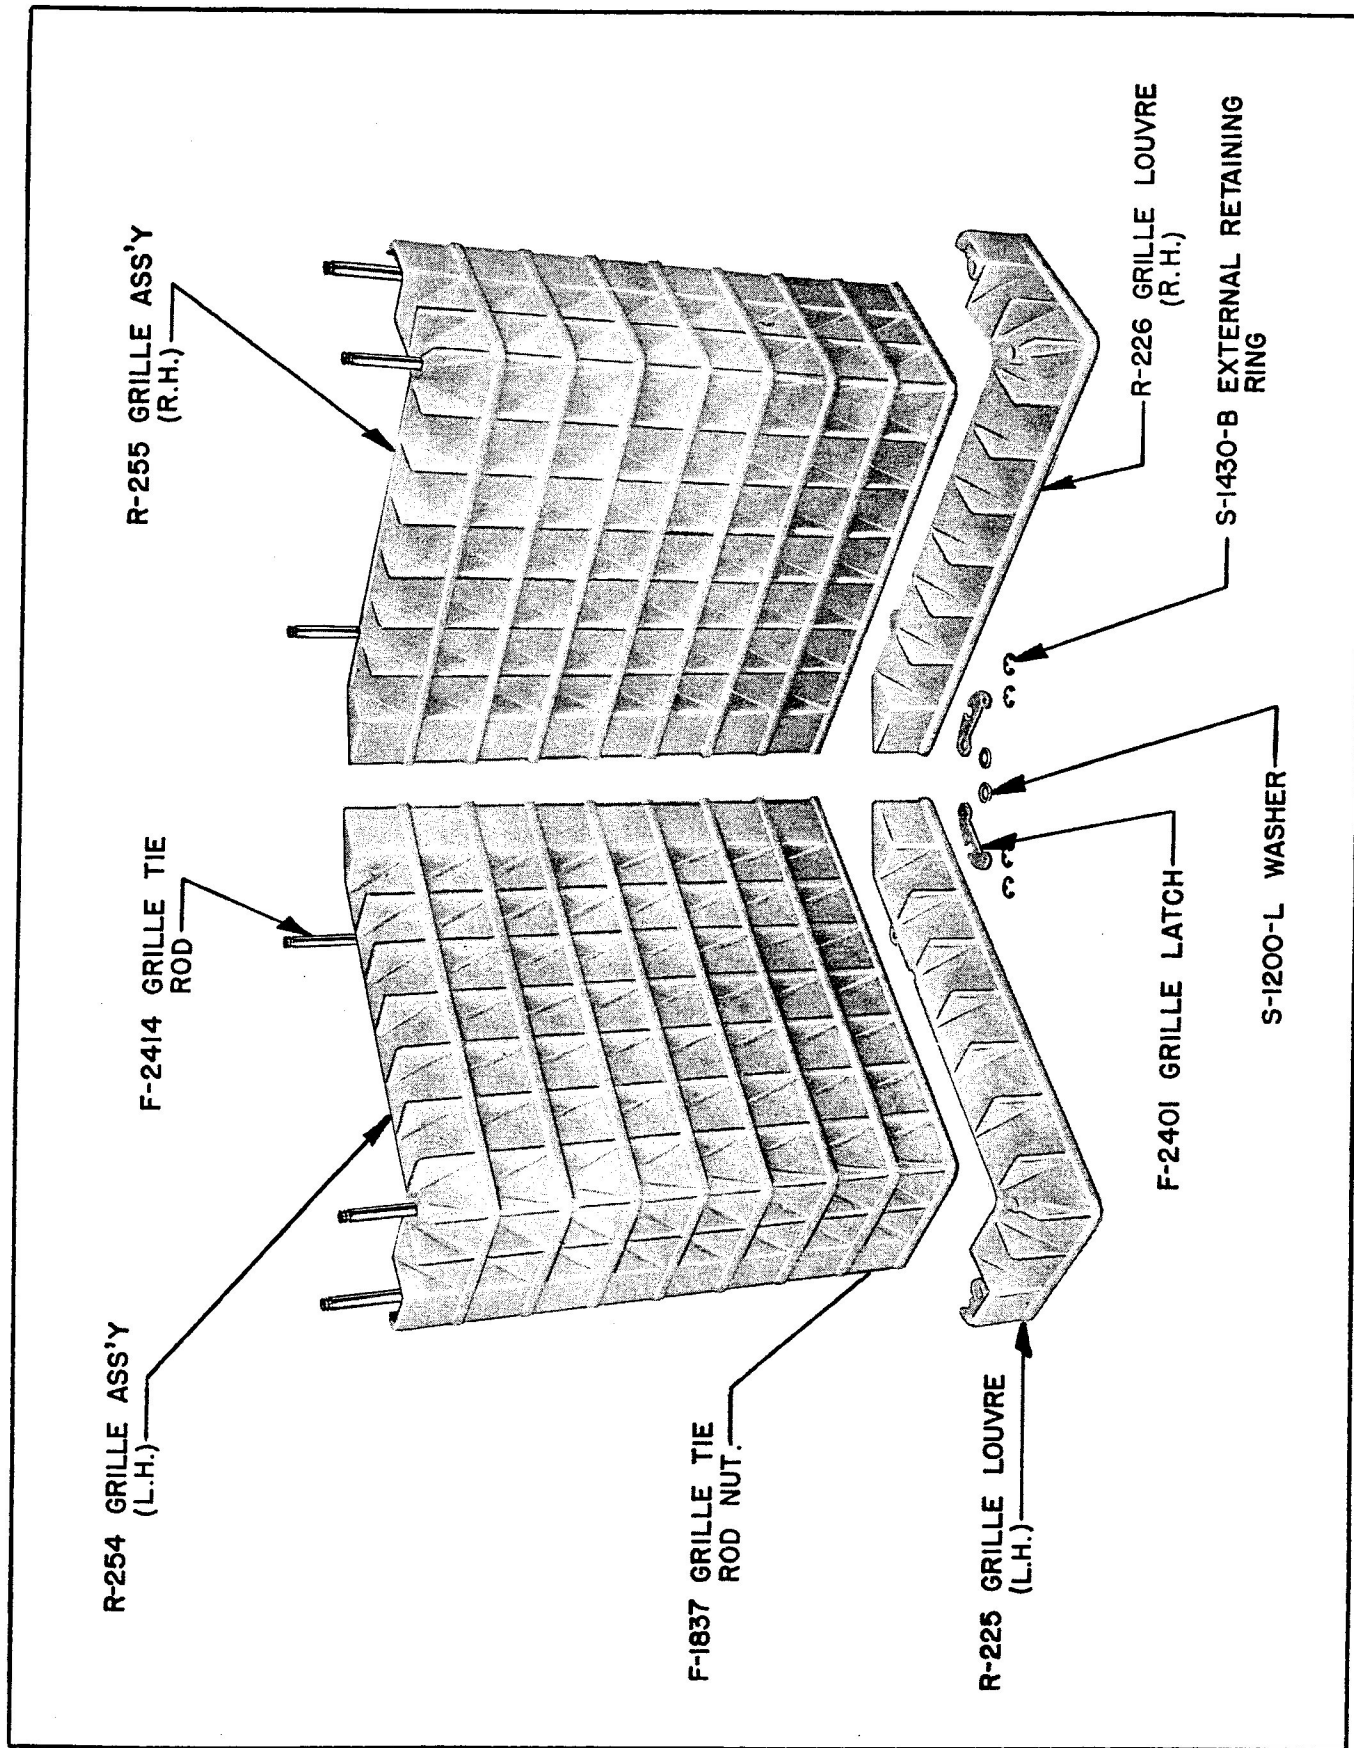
GRILLE ASSEMBLY PARTS GROUP
